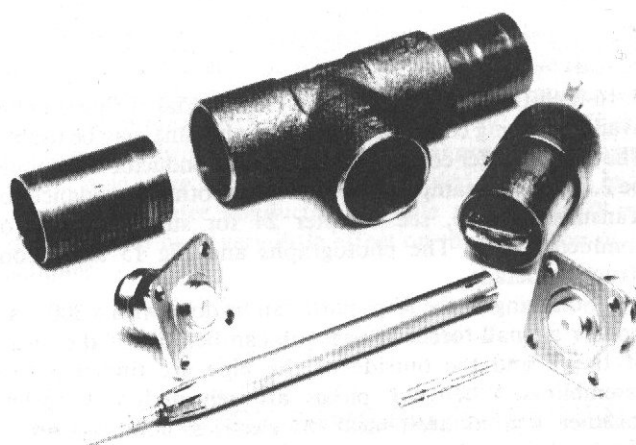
Major components of the line sampler. The brass T and two end sections are at the upper left in this picture. A completed probe assembly is at the right. The N connectors have their center pins removed. The pins are shown with one inserted in the left end of the inner conductor and the other lying in the right foreground.
